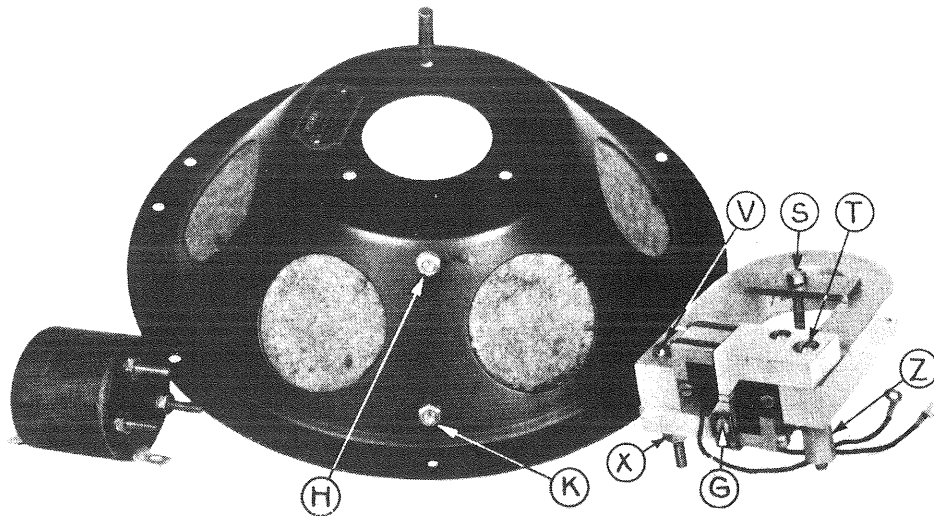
Loudspeaker disassembled, showing the frame, filter and motor mechanism with their respective mounting screws
